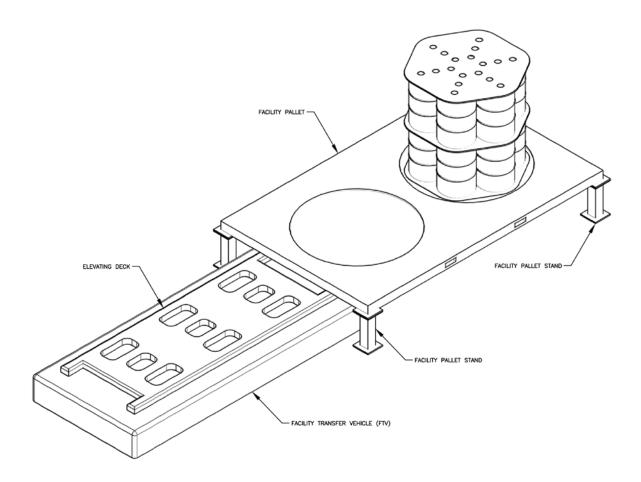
Facility Transfer Vehicle, Facility Pallet, and Typical Pallet Stand
